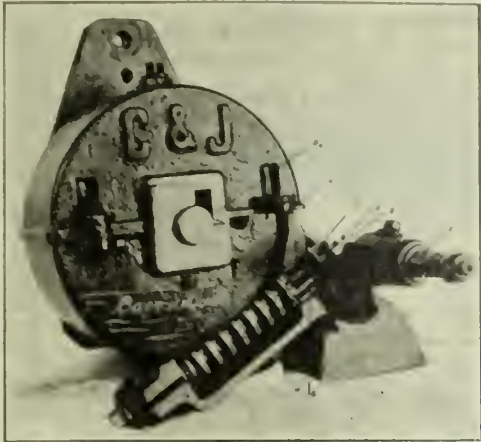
A LADLE GEAR CASE CUT OPEN TO SHOW ITS INTERNAL MECHANISM.
